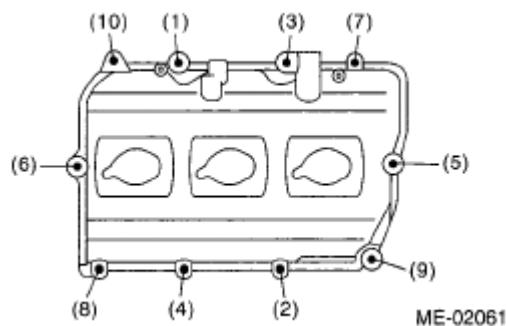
Identifying Rocker Cover Bolts (LH Side)
